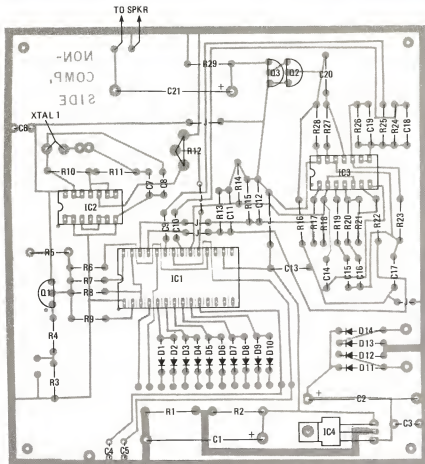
COMPONENT LAYOUT showing positions of all on-board parts. Switches, speaker and power transformer are mounted in the case.
